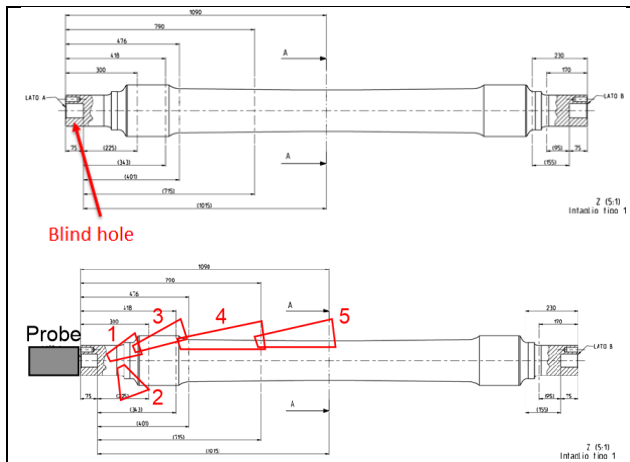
Phased array rotating probe for ultrasonic inspection of solid axles from blind holes manufactured at their ends
